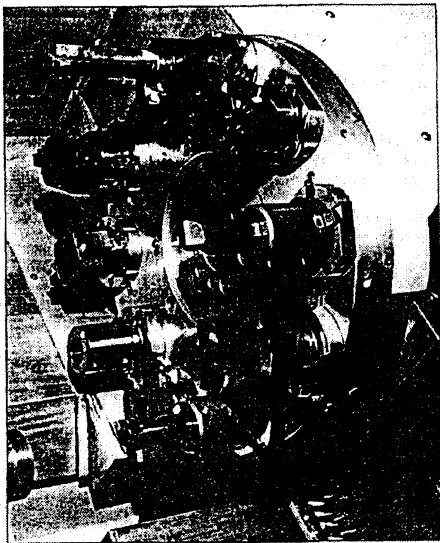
A turning centre with KV quick-change tooling and automatic clamping units (Courtesy of Kennametal (UK) Ltd.)
